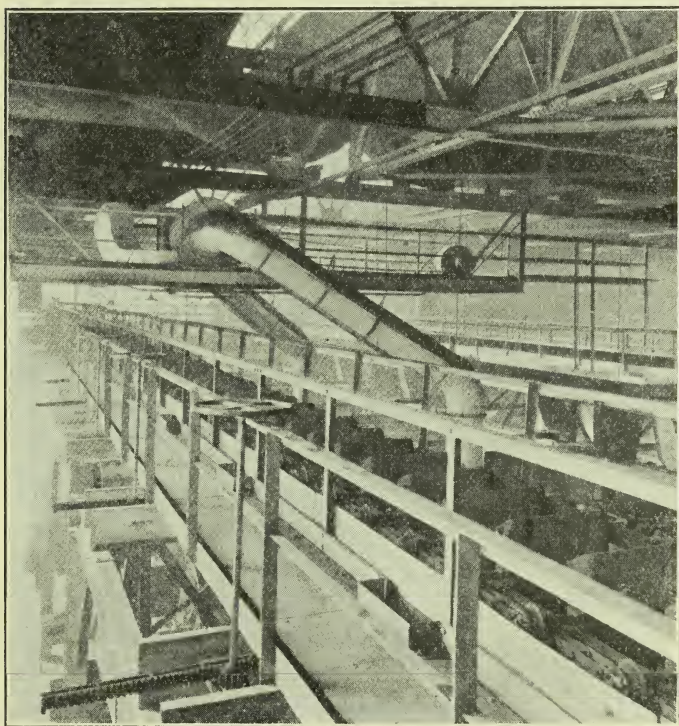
APRON CONVEYOR THAT DELIVERS TEMPERED SAND TO THE HOPPERS DIRECTLY ABOVE THE MOLDING MACHINES
